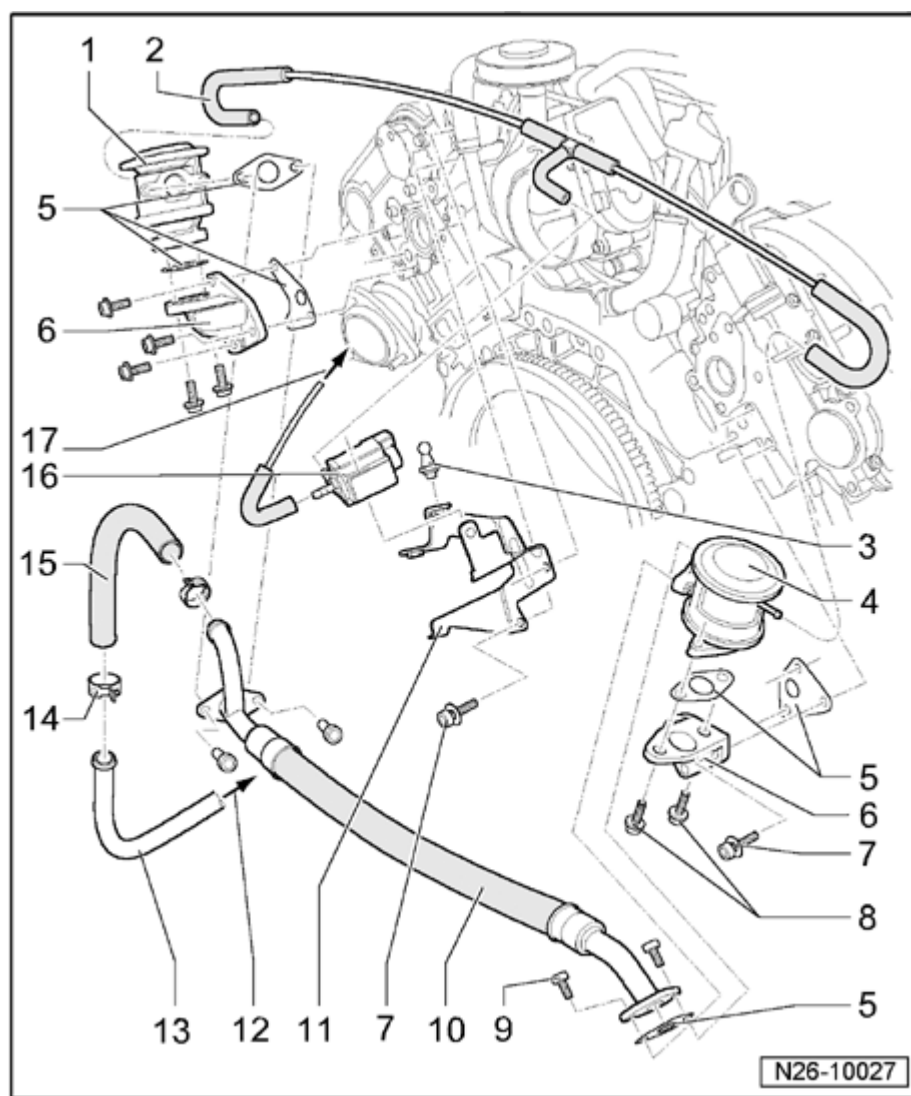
Secondary Air Injection System Components, Engine Side, Assembly Overview
